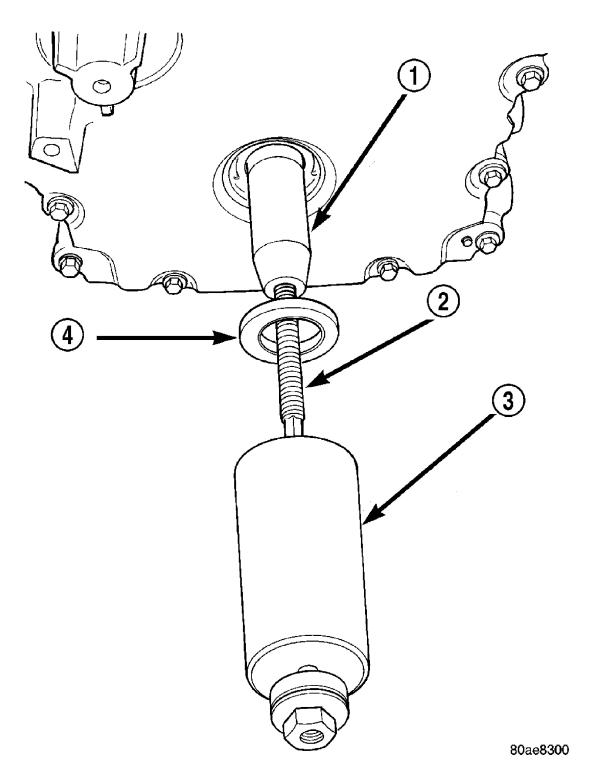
Installing Crankshaft Front Oil Seal Courtesy of CHRYSLER LLC
